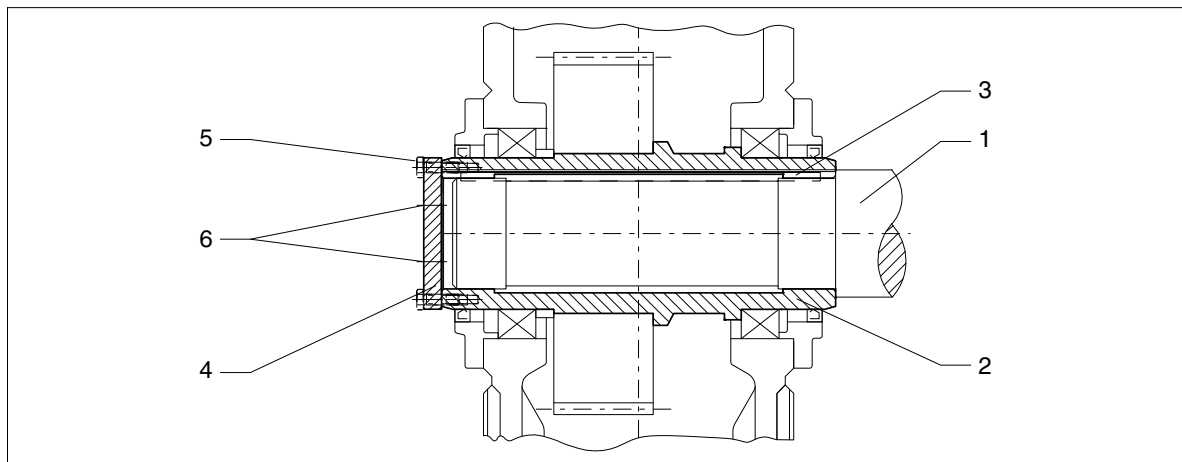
Hollow shaft with parallel keyway, demounting with end plate
